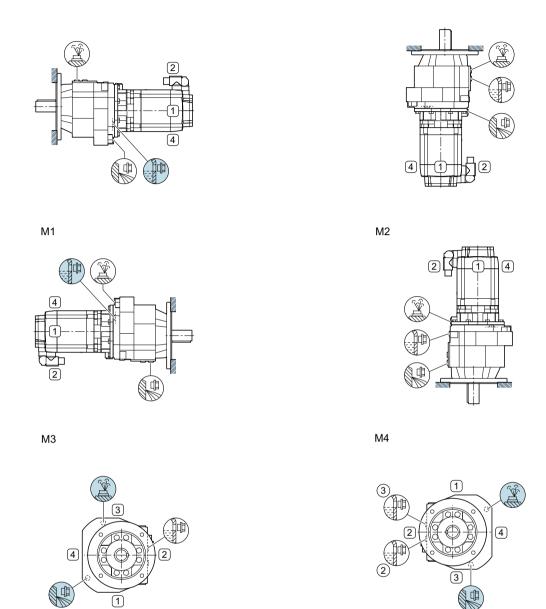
Mounting positions for servo helical geared motors DF and ZF (flange-mounted design) or DZ and ZZ (housing flange design), frame sizes 49 - 129, 2 stage and 3 stage
